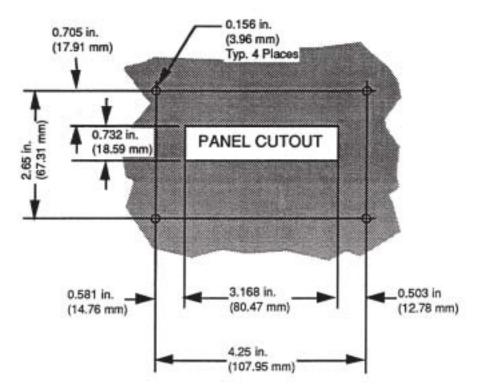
473.13c LCD Display Mounting Dimensions
